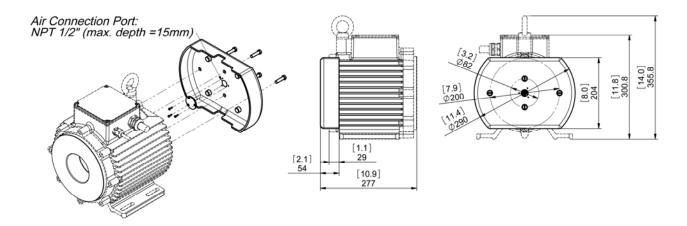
Basic dimensions (in mm and [inch]) LPM-4000 motor with ACM-4000.1 & 3 Air Cooling Module
